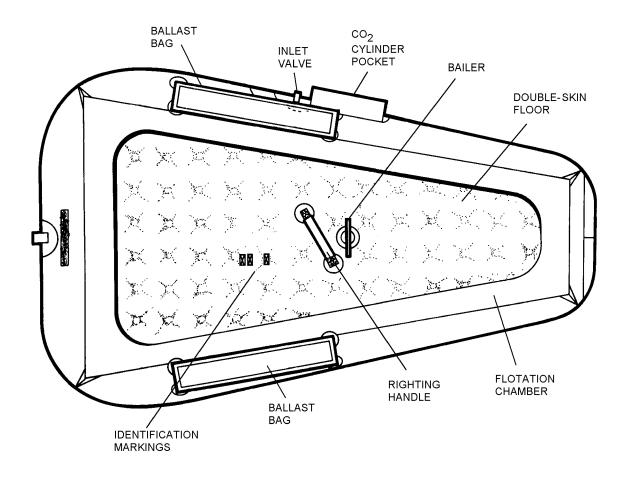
LRU-23/P Liferaft Assembly Components and Parts (Sheet 2)
